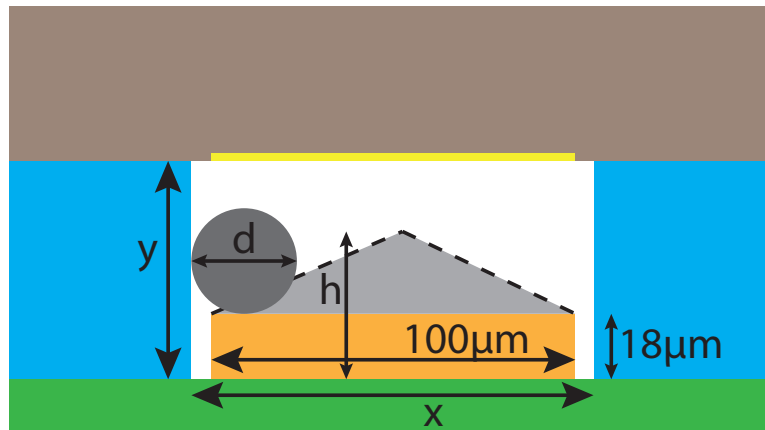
A profile view of the solder well dimensions used to calculate solder height.
